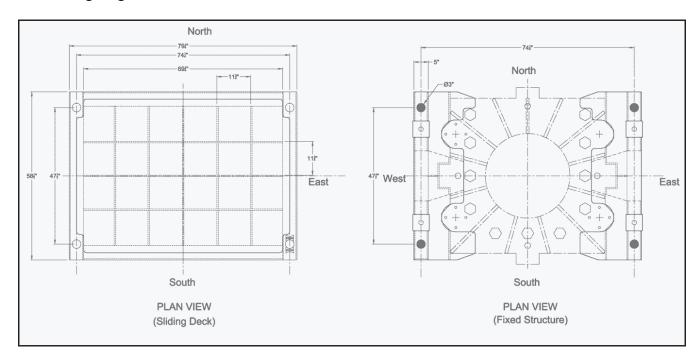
Decoupled Shock Mitigating Test Fixture Plan Views
